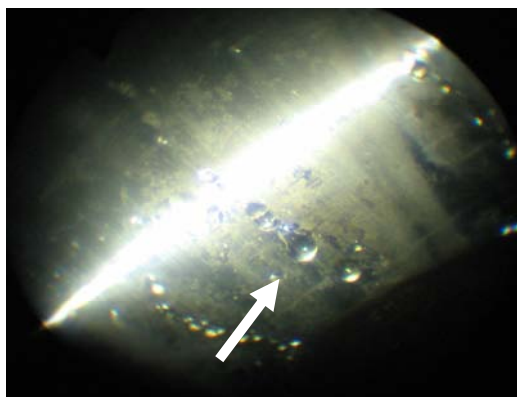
Marine engines' cylinder liner defects identified during endoscopic inspections
